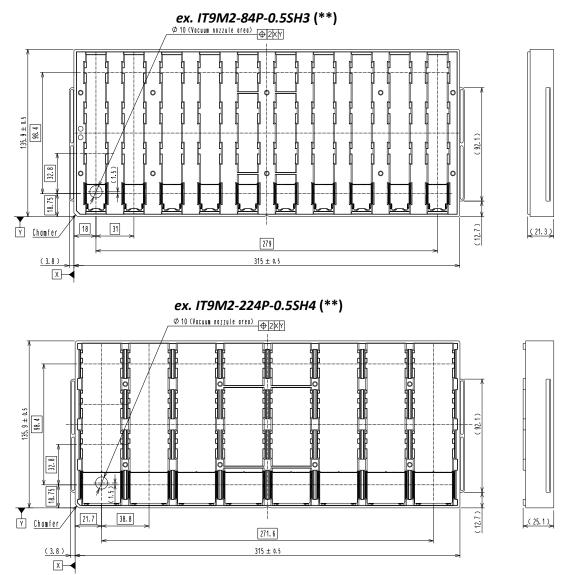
Hard Tray for IT9 Plug (dimensions in mm)
